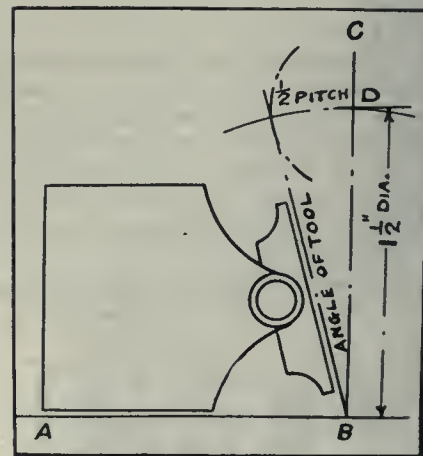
TOOL SIDE CLEARANCE DIAGRAM
